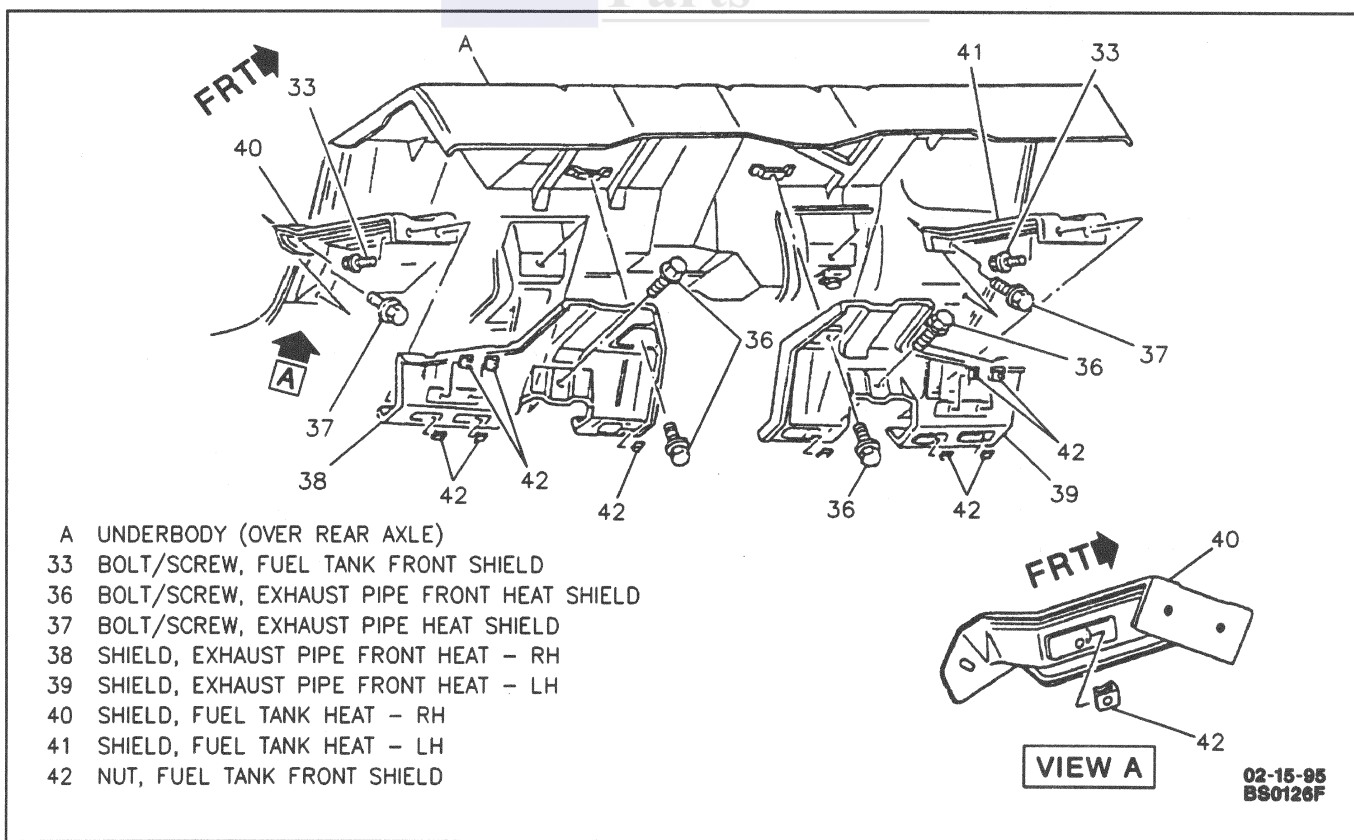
Exhaust Pipe Front and Fuel Tank Heat Shields (Sedan)
